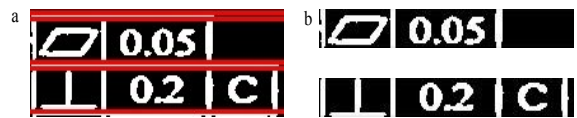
(a) A multi-line tolerancing callout block;
